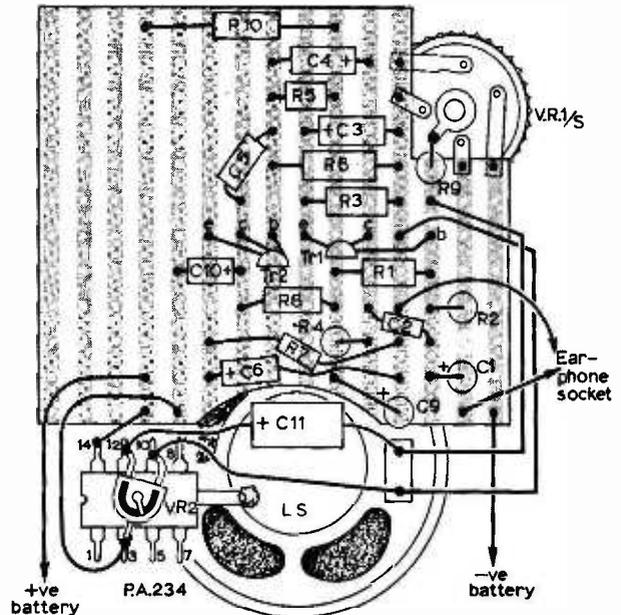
The component layout. The heat sink tab of the i.c. is soldered to the magnet of the loudspeaker.
